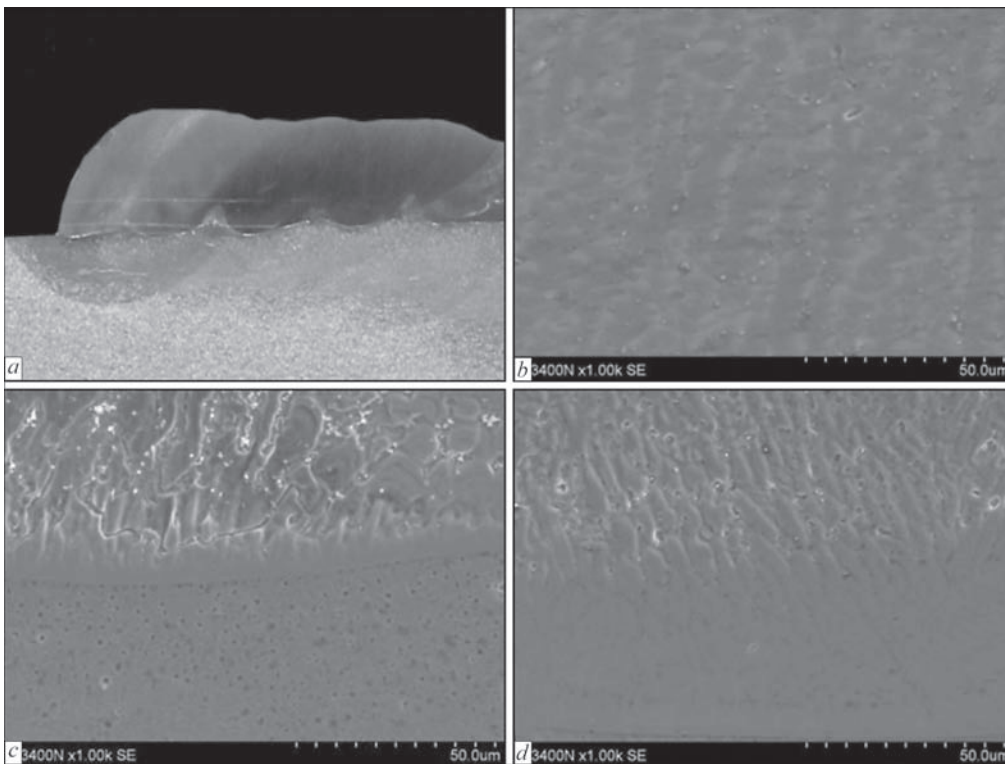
Structure of the overlay weld made of alloy Inconel 625 on the tube made of steel 13CrMo4-5, specimen of item 7 of Table 1: *a* — overlay weld macrostructure (SM); *b* — overlay weld structure, SEM, SE; $\times 1000$; *c* — fusion line, SEM, SE; $\times 1000$; *d* — fusion line with the visible zone enriched in chromium SEM, SE; $\times 2000$
